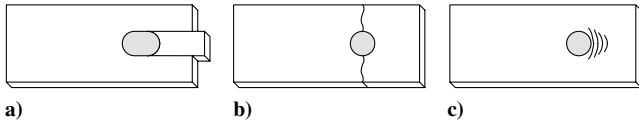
Failure modes for bolt loaded joints: a) shearout failure, b) net tension failure, c) bearing failure.
